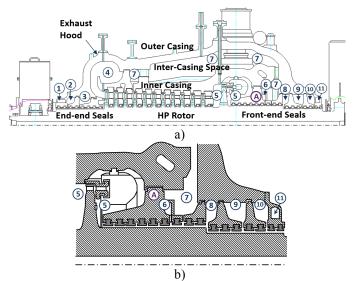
325 MW Steam Turbine: (a) HP Cylinder Cross Section, (b) Front End Seals Arrangement (Baseline Design)
